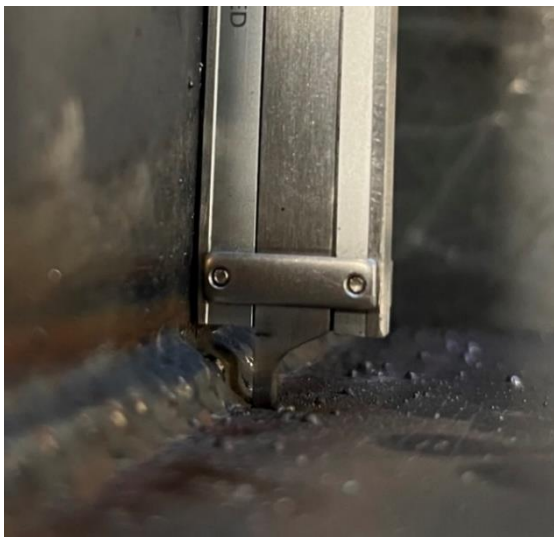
Measuring fillet weld with dial calipers for more precision.
